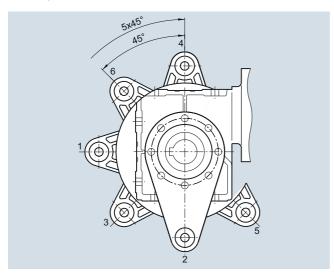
/13 Worm gearboxes S in a shaft-mounted design
